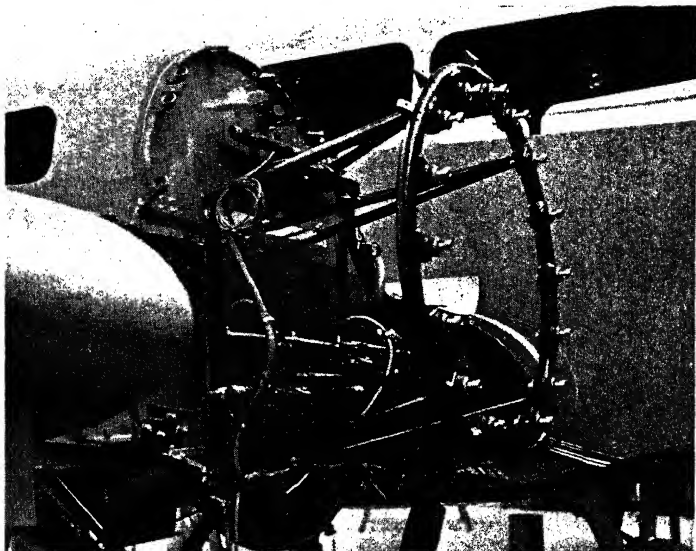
SHOWING RUBBER BUSHES AT FRONT OF MOUNTING.
